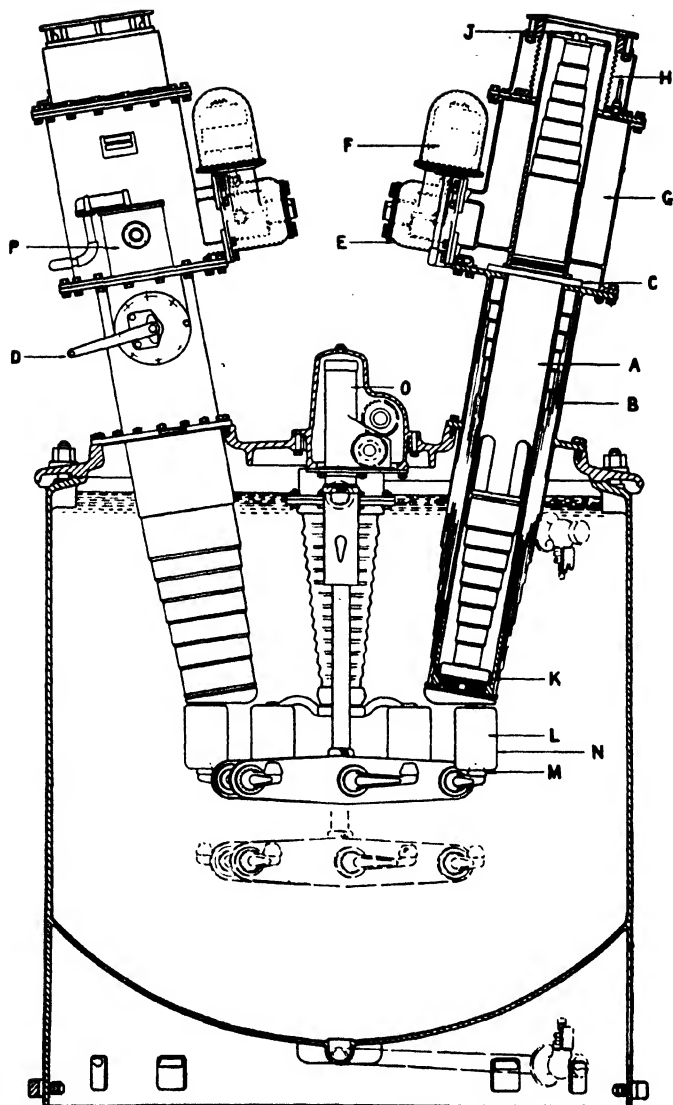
SECTIONAL VIEW OF 132 KV. METAL-CLAD OIL CIRCUIT-BREAKER
